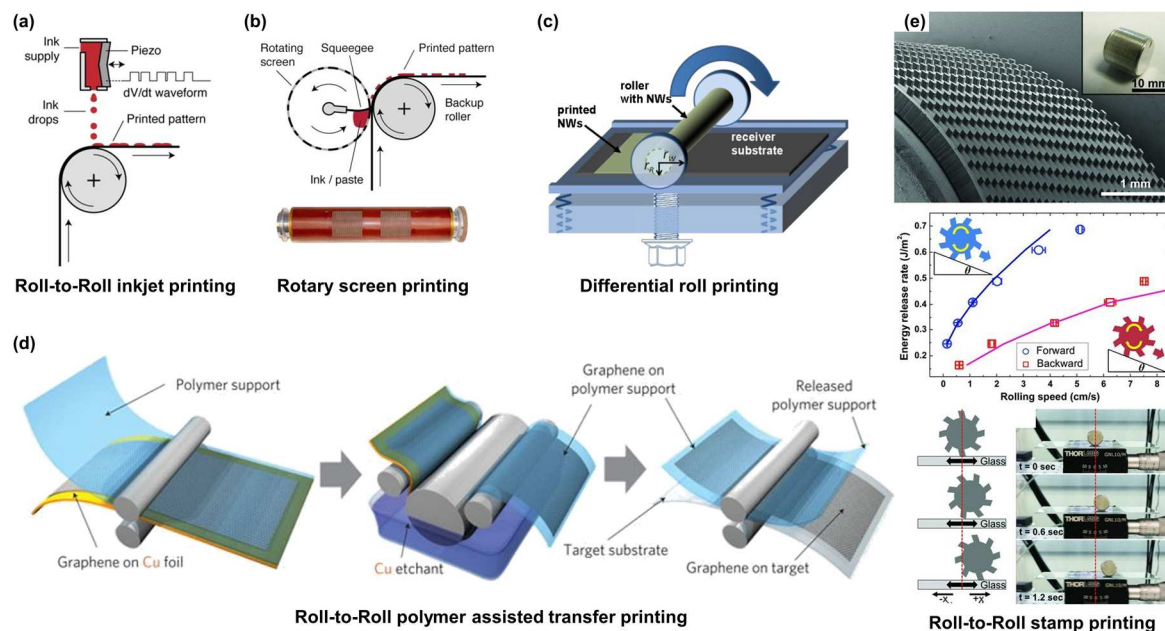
Roll-to-Roll printing technology. The Roll-to-Roll version of (a) inkjet printing, (b) screen printing, (c) contact printing, (d) polymer assisted transfer printing and (e) stamp assisted transfer printing. Reprinted and adapted with permission. (a) and (b) are from Ref [129]. Copyright © John Wiley and Sons. (c) is from Ref [133]. Copyright © AIP Publishing. (d) is from [131]. Copyright © Springer Nature. (e) is from Ref [130]. Copyright © John Wiley and Sons.
